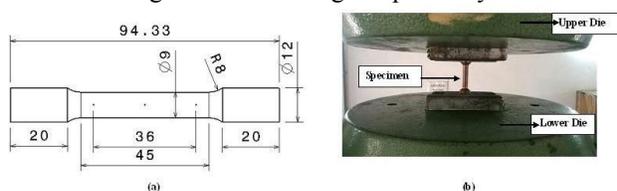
(a) Standard tensile specimen (b) Closer view of the tensile testing.
